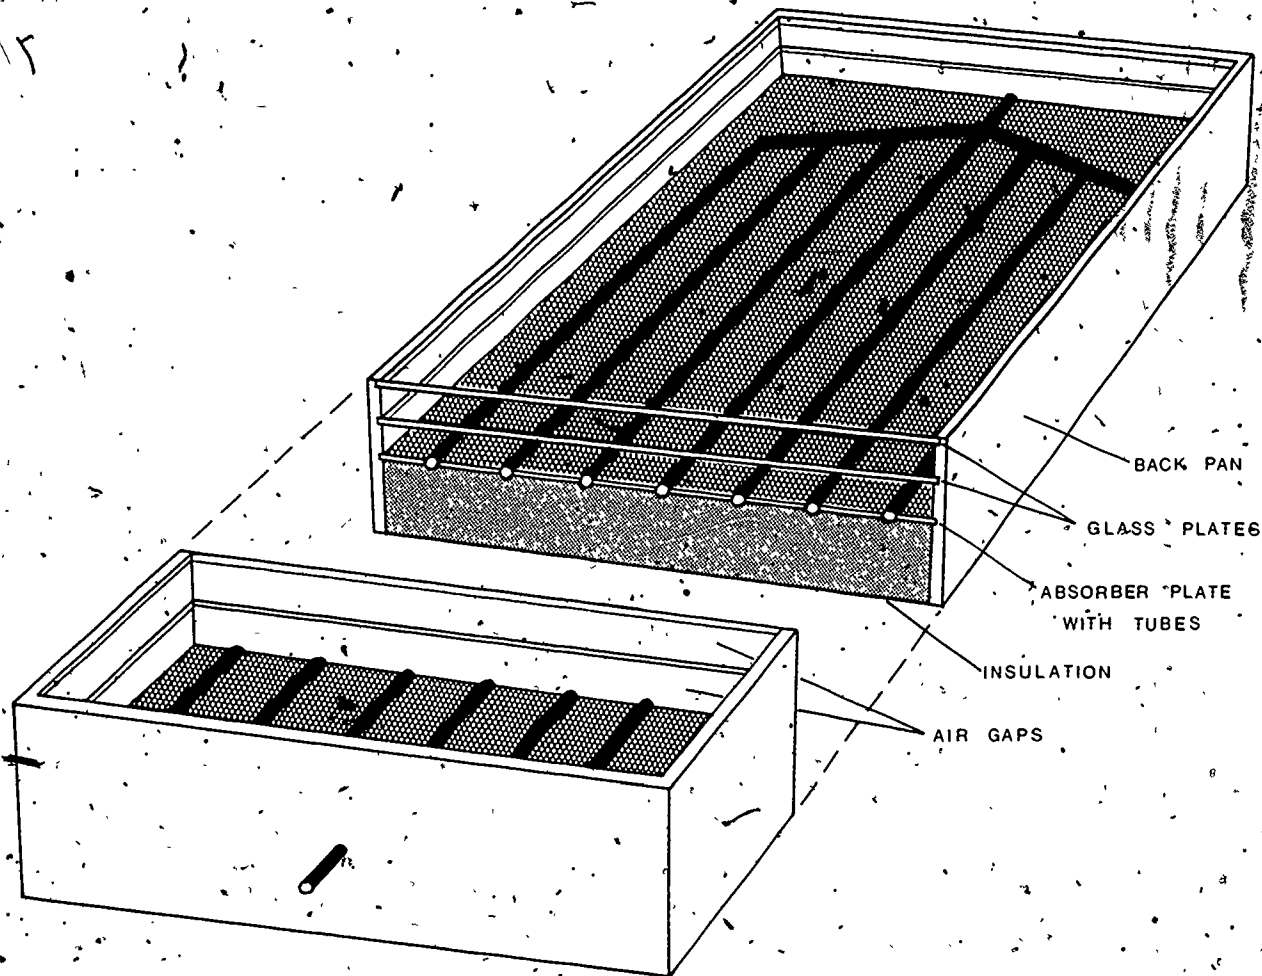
Flat plate collector design for a water type collector. The water tubes are fabricated in the collector plate.
